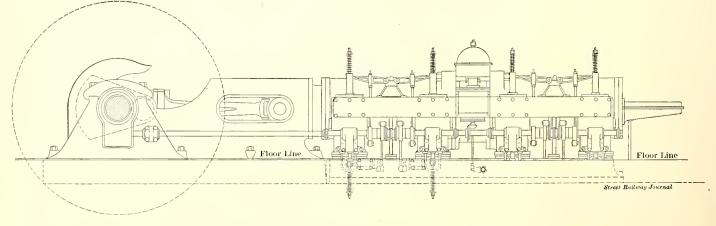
LONGITUDINAL SECTION OF 1590-HP DOUBLE-CRANK HORIZONTAL GAS ENGINE
